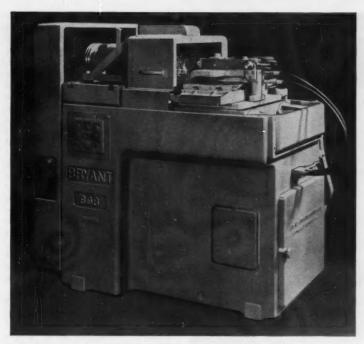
Bryant precision boring machine equipped with cross-slide for generating with single-point tools, and a dial type boring-bar
